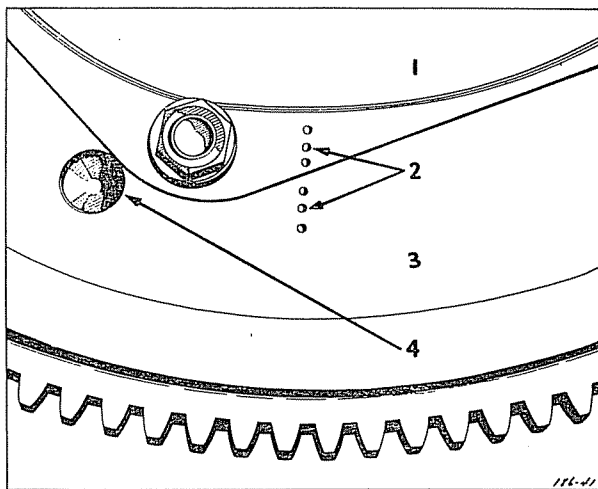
Punch Marks on Clutch Cover and Flywheel.
